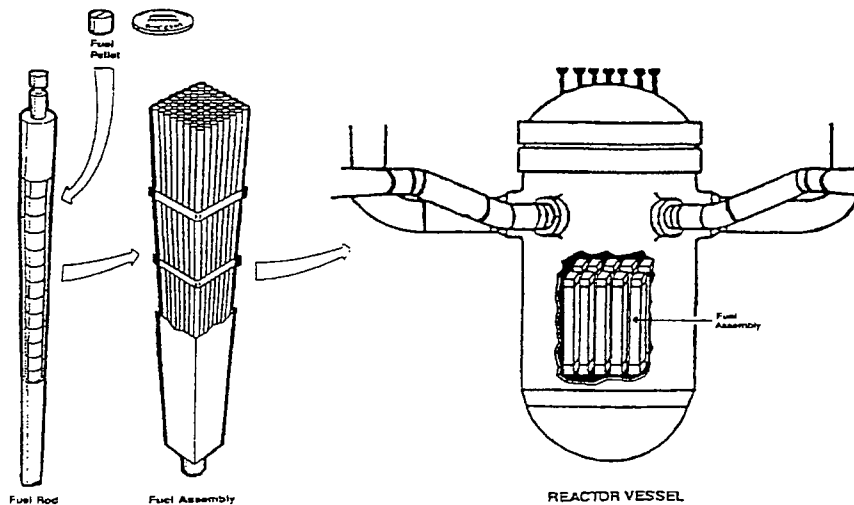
The reactor core at Davis-Besse contains 177 fuel assemblies. Each assembly contains 208 fuel rods. Each fuel rod is filled with approximately five pounds of fuel pellets, each pellet is approximately 3/8 inch diameter and 5/8 inch long.
